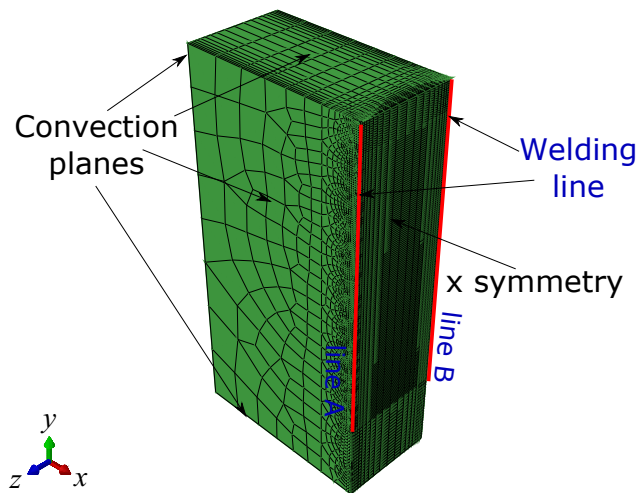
Boundary conditions for thermal analysis of laser welding
